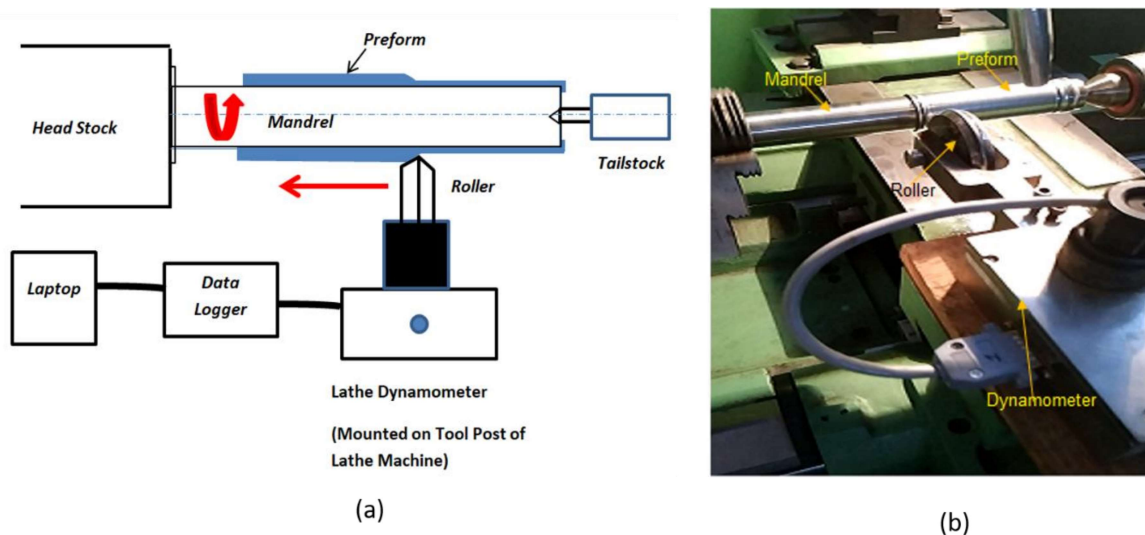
(a) Layout of data acquisition system (b) Actual measuring setup used during investigation with Lathe dynamometer
